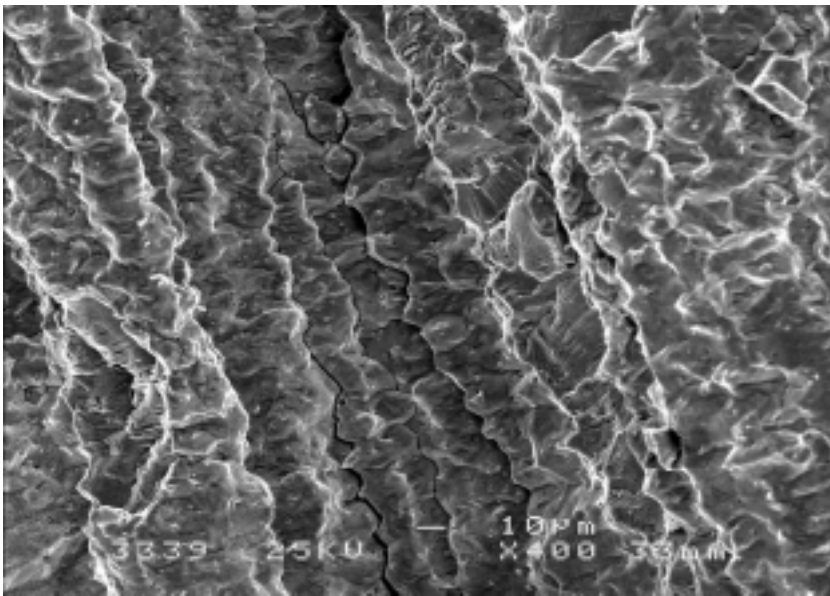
A detail of the fracture surface 8 showing interdentritic fracture.
